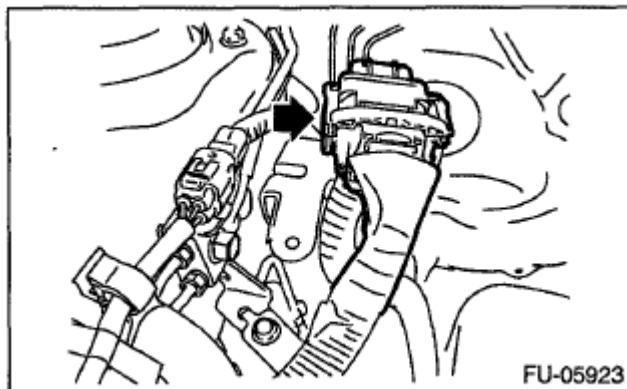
Locating Bulkhead Harness Connectors From Engine Harness Connectors
